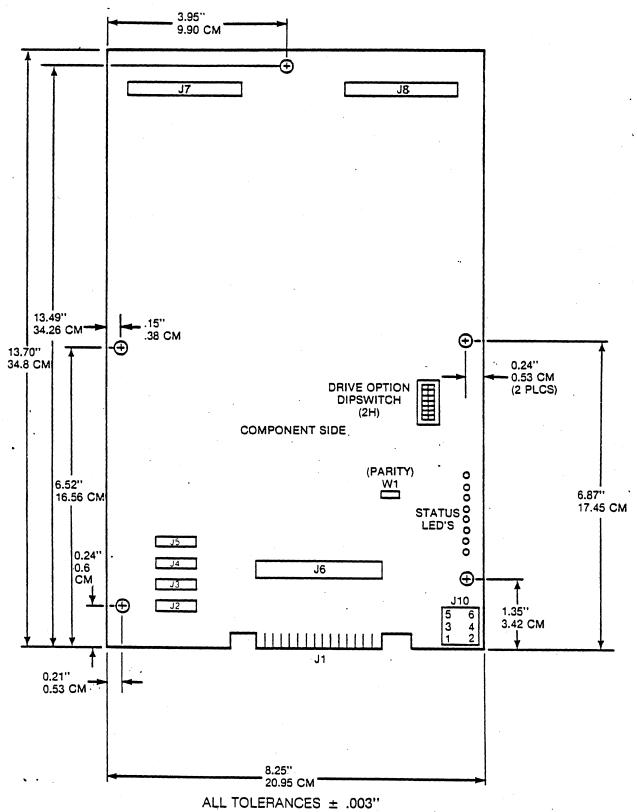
SA1403D DIMENSIONAL DRAWING
